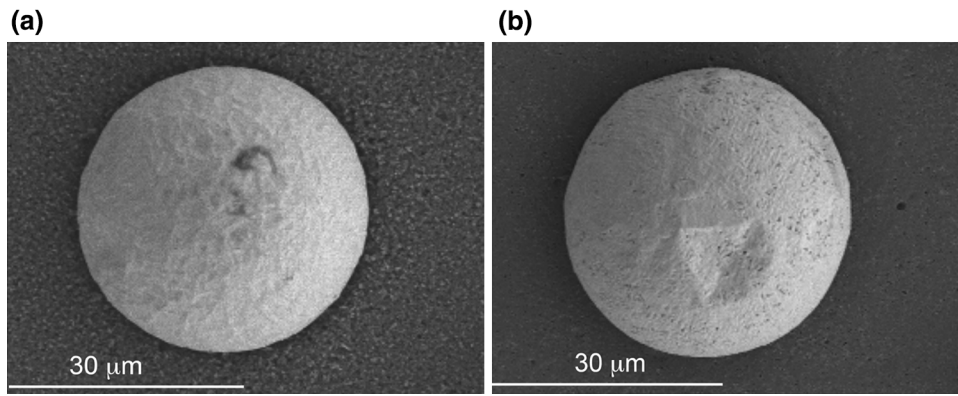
Surface morphology of 35- μ m-radius soldered bumps after reflow: (a) bump surface with 4.2-nm-thick oxide layer; (b) bump surface with 7.2-nm-thick oxide layer.
